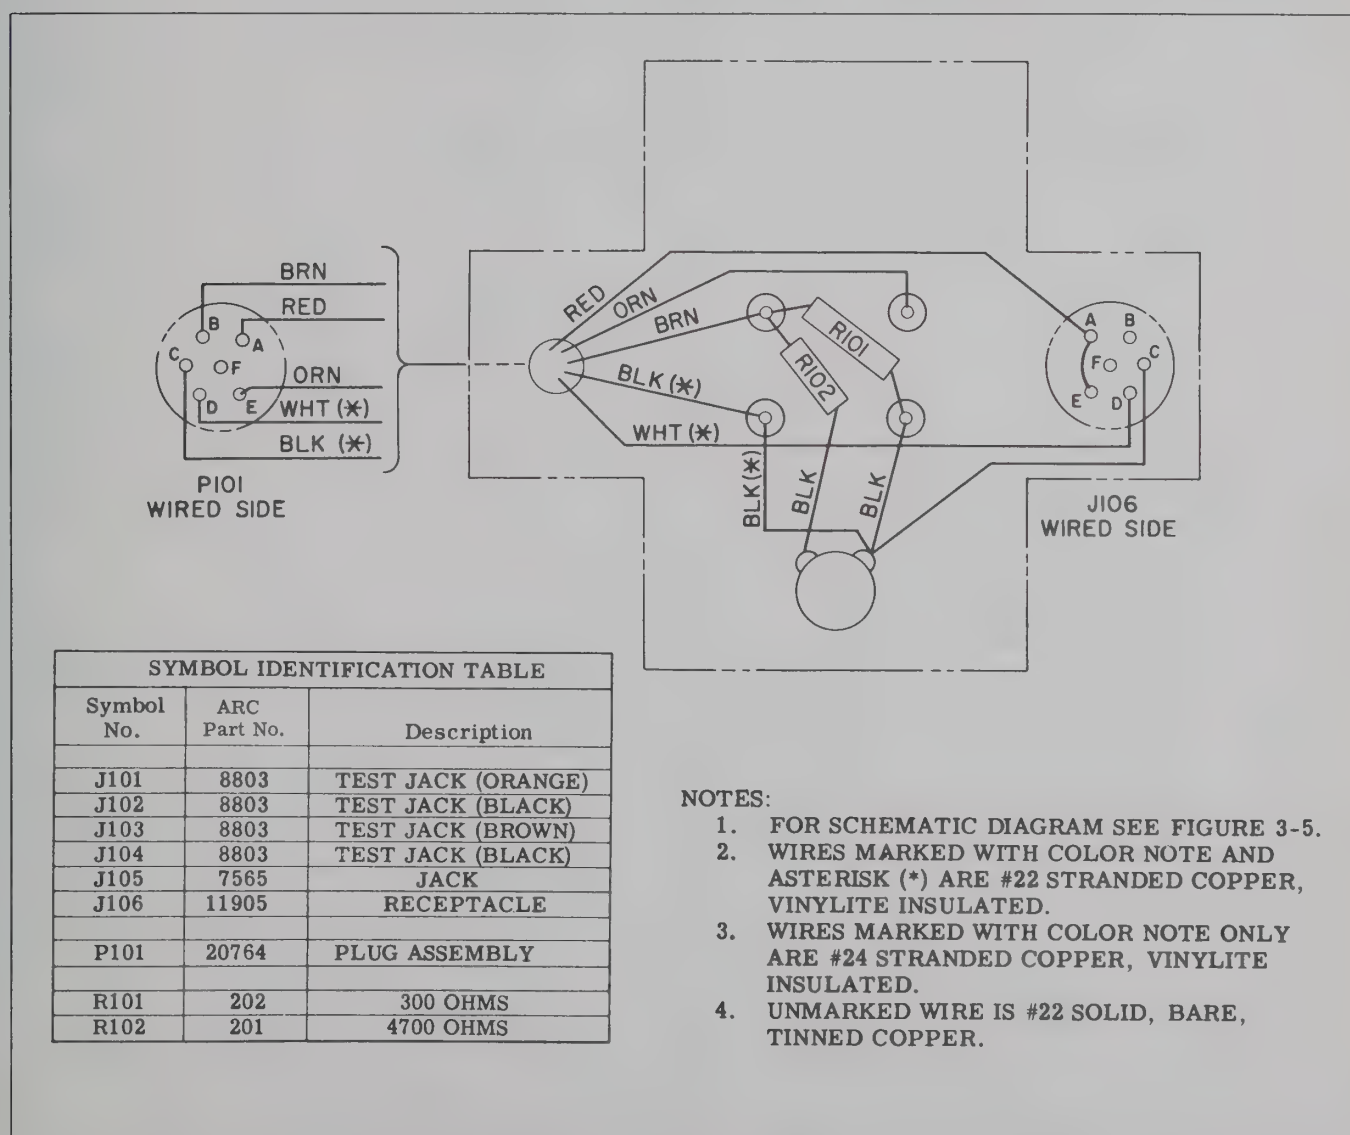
Cable Assembly ARC-20689, Wiring Diagram
